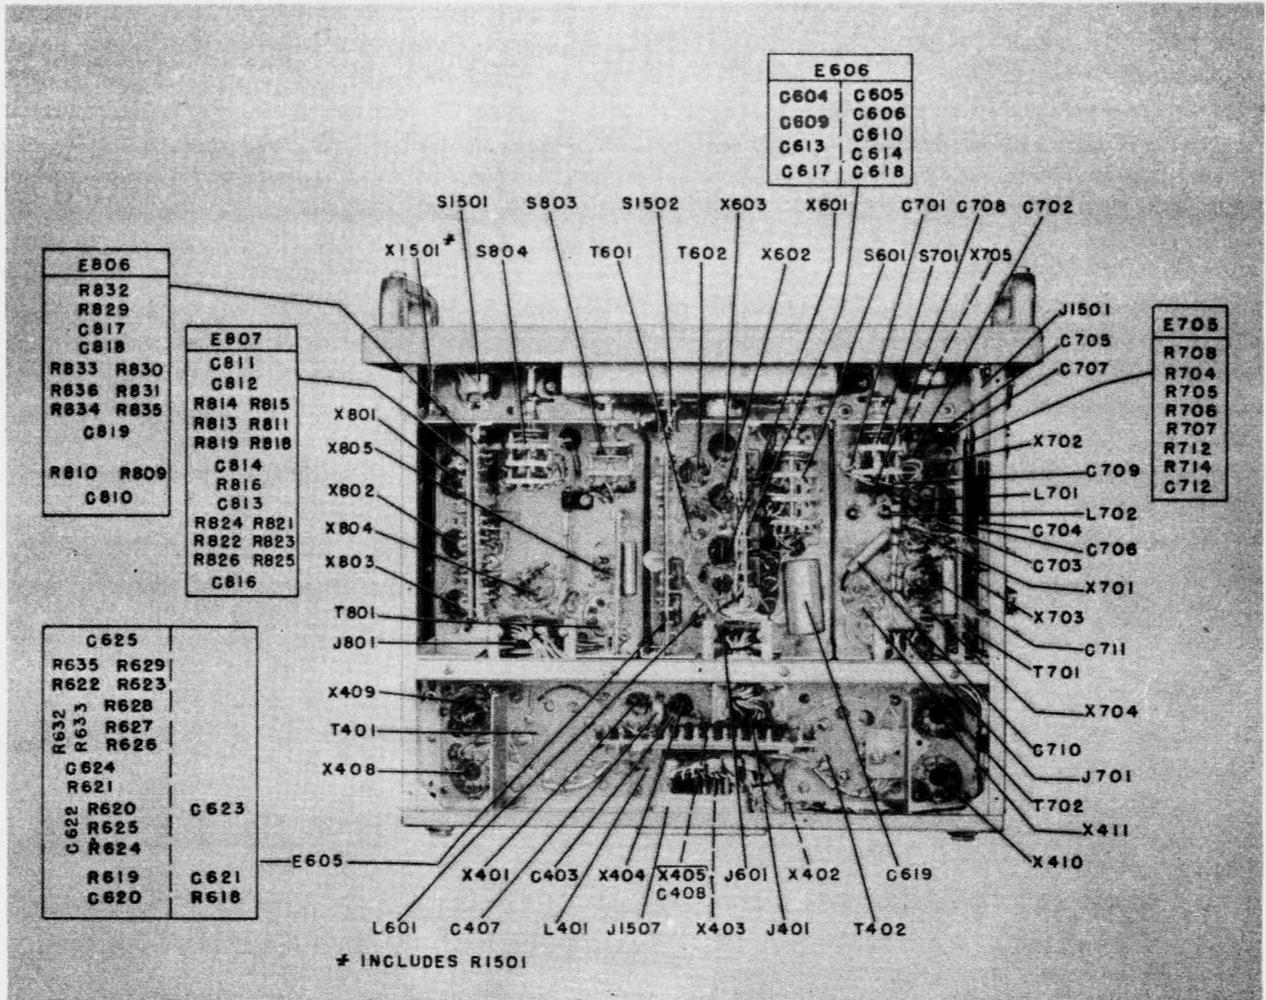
Comparator Keyer Component Location, Bottom View, Sheet 1
